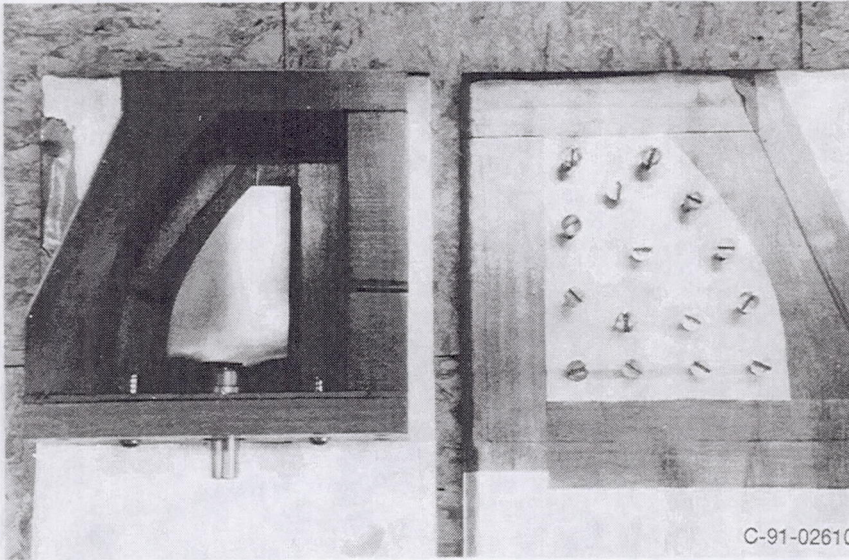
Aluminum plate that has been bead blasted and has flathead screws installed.
